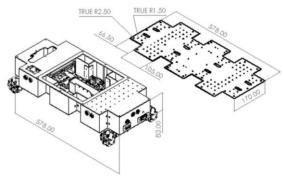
Assembly during of the mobile robot. Isometric model (left) and platform dimension (right). The units given above are in milimeters.
